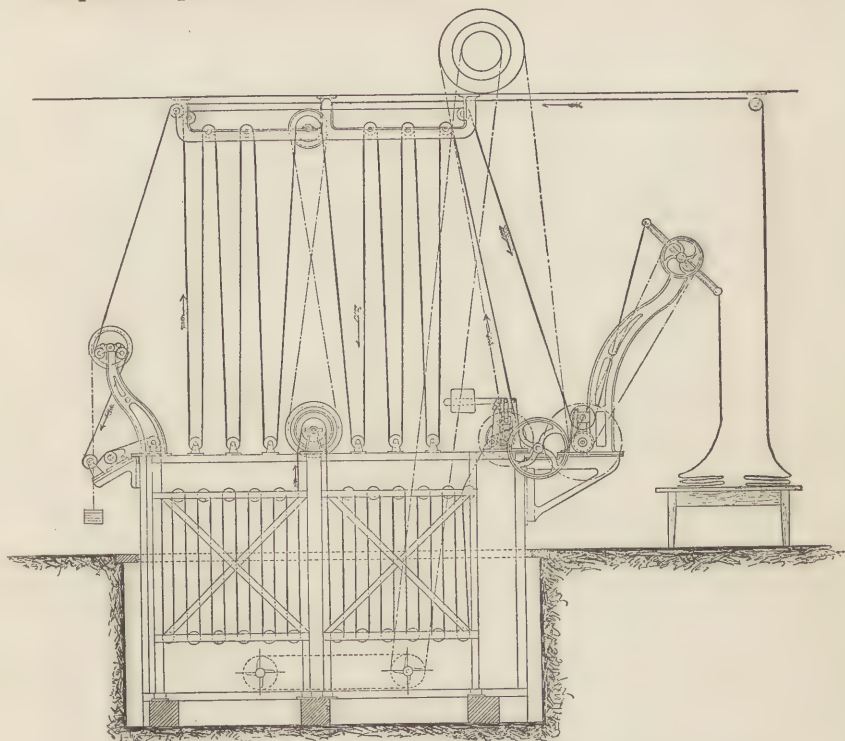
Continuous indigo-dyeing machine (E. Welter & Co.)—(section).
